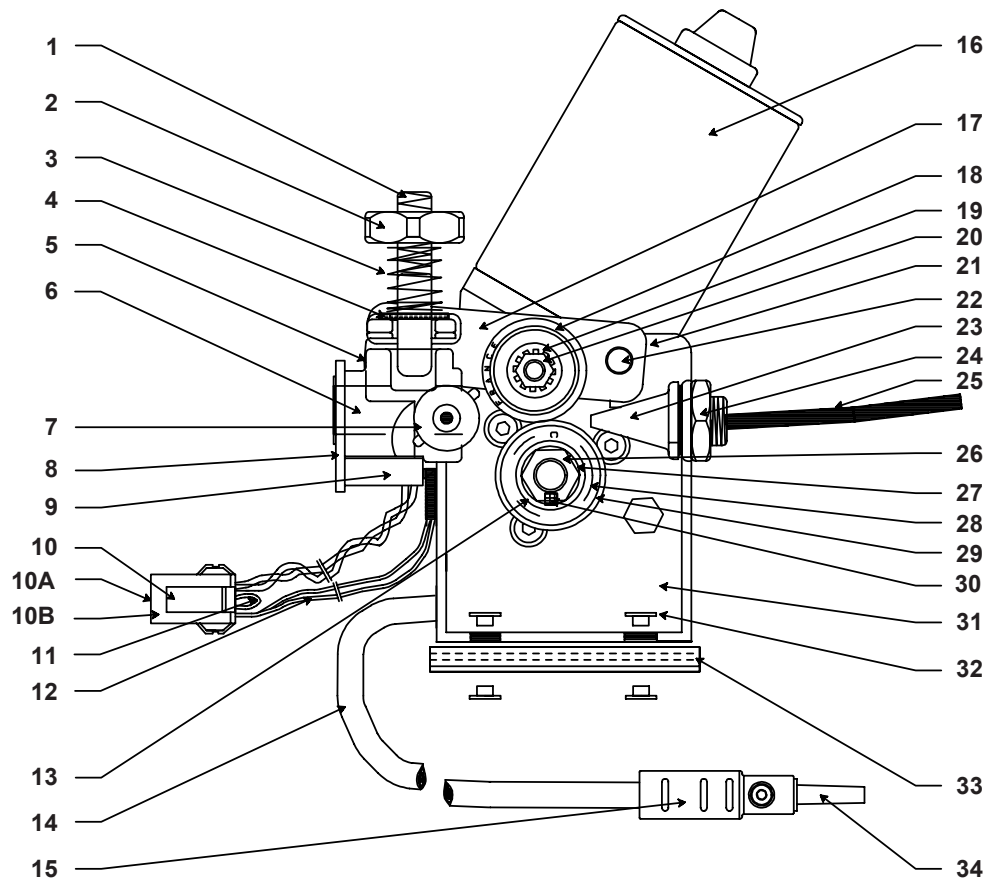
WIRE DRIVE ASSEMBLY (SN-138C24B)
